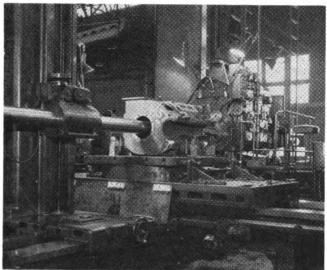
Built-up housing ready for the machining done on the first set-up.
